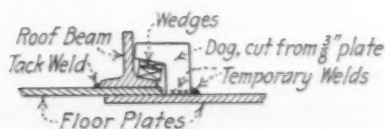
Method of Taking Bulges Out of Bottom Plates
